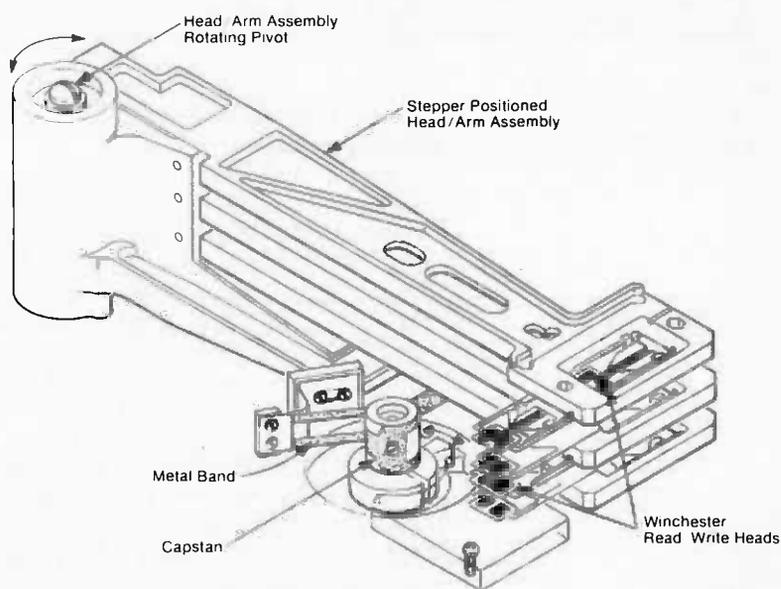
The Shugart SA4000 fixed disk head actuator assembly. A novel coiled-metal band driven by a stepper motor is used to position the head assembly. Graphics courtesy Shugart Associates.
